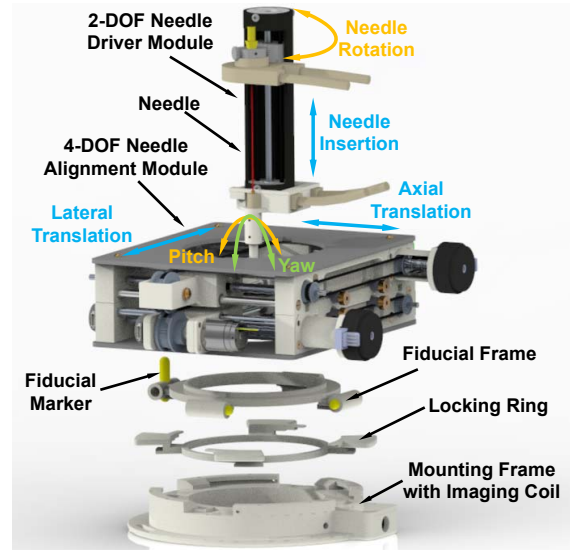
CAD model of the 6-DOF body-mounted robot, demonstrating the major components, improved design of the mounting mechanism, integrated imaging coil, and degrees of freedom.
